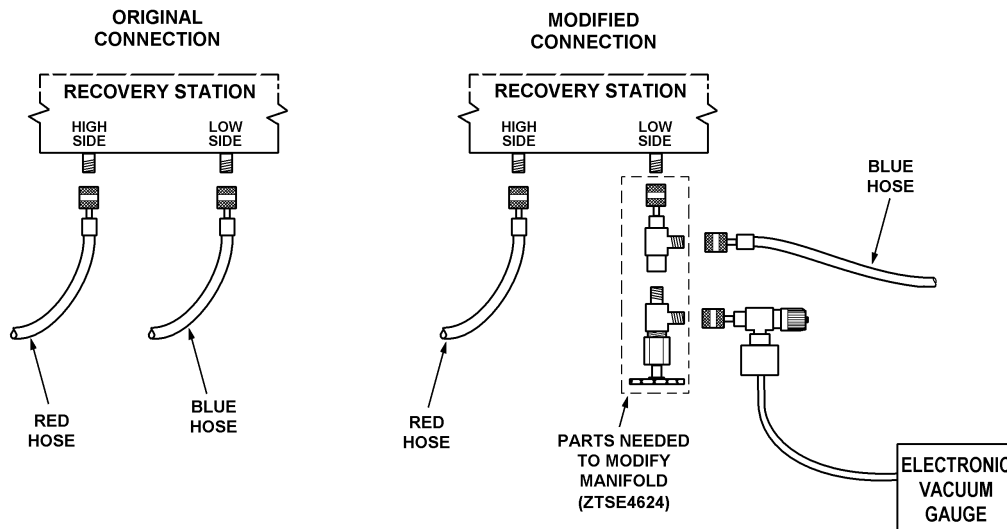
Electronic Vacuum Gauge Manifold, ZTSE4624
